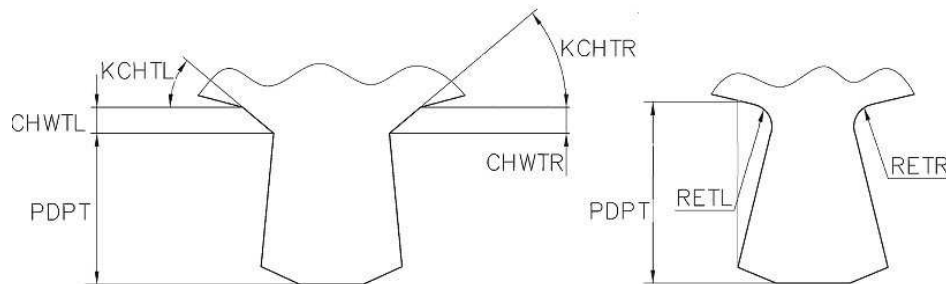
Flank chamfer angle, flank chamfer width, flank radius, profile depth
